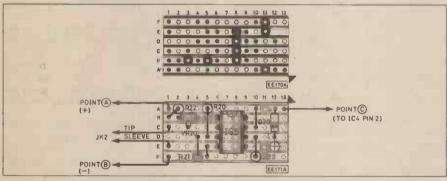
Drilling details and component layout for the cut-beam triggering optional add-on circuit.
